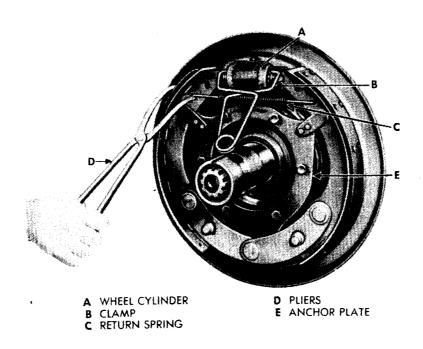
Brake Shoe Return Spring Removal (Clamp 41-C-1835 and Pilers 41-P-1579)
